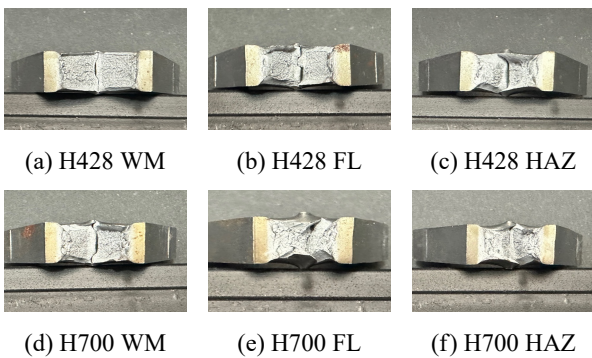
Fracture surface of welded Charpy impact test
